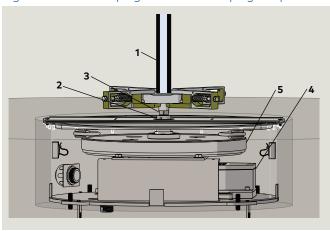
Bottom plug inserted in bottom plug adapter
